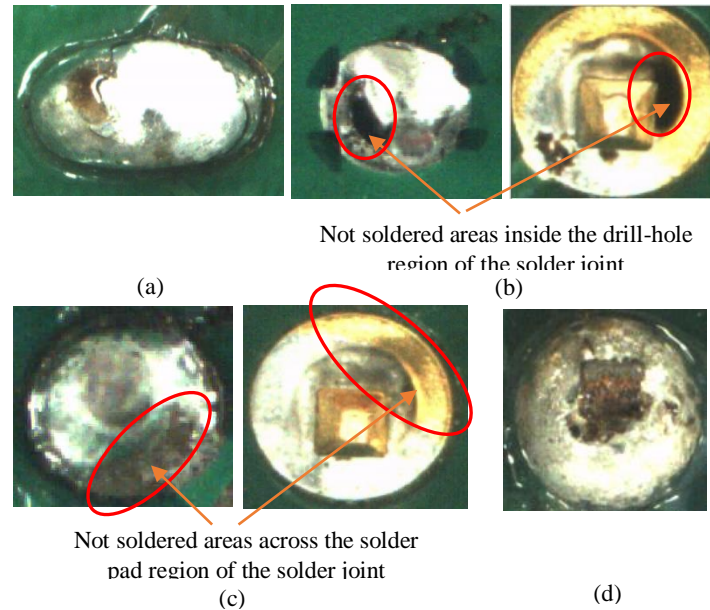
Different types of soldering defects. (a) Solder bridging. (b) Voids inside drill-hole region. (c) Voids on the pad region. (d) Excess solder on the joint
